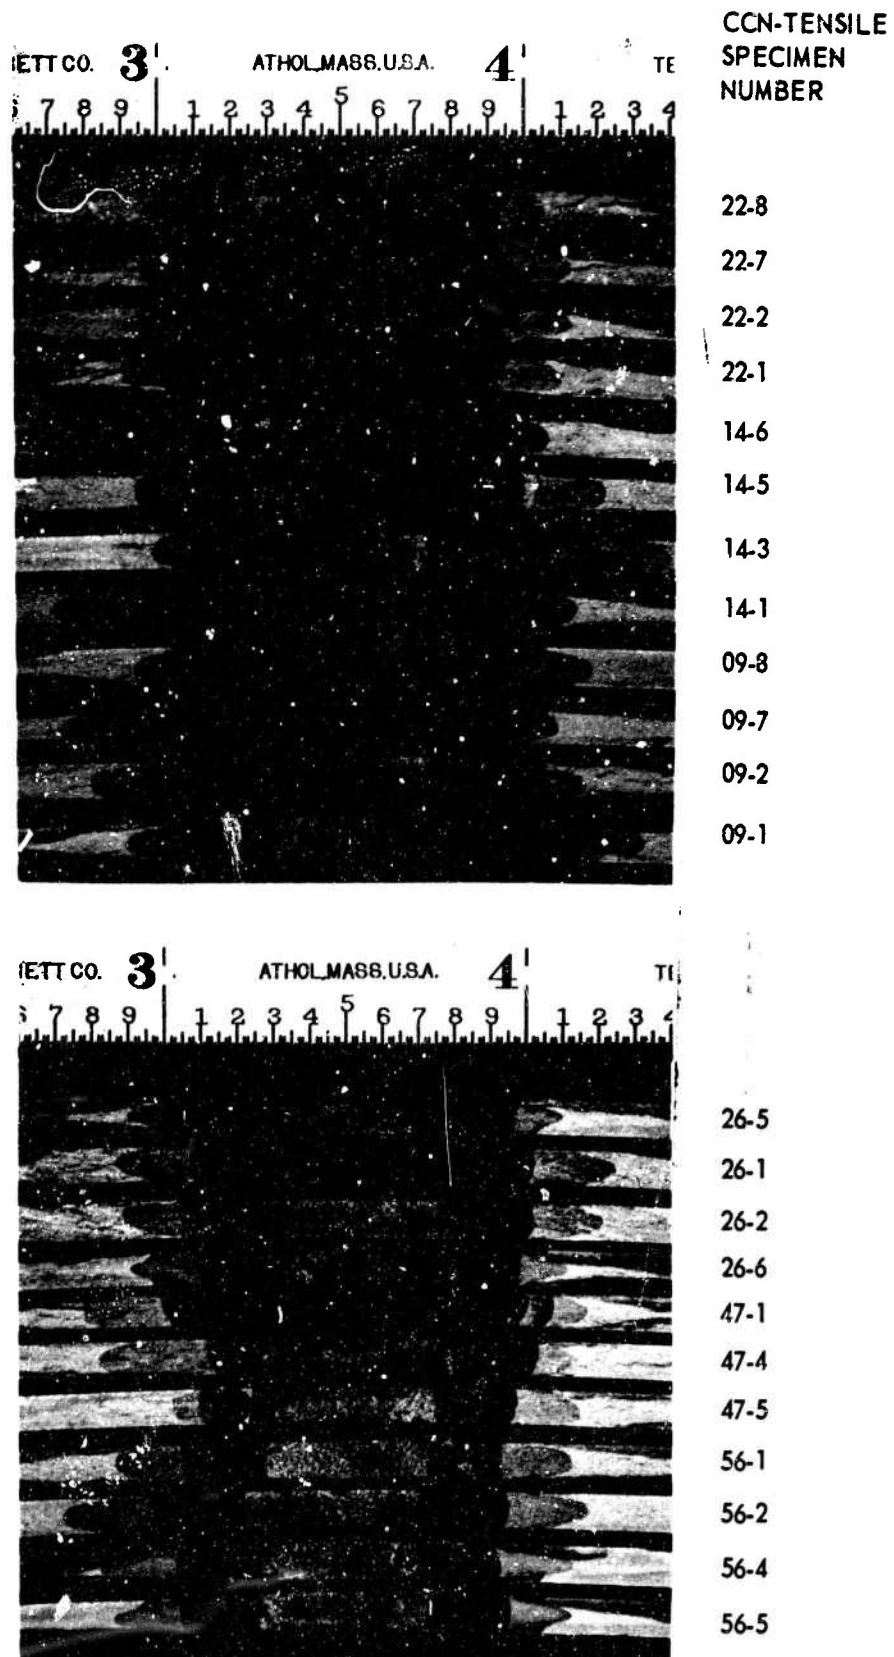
Heat-Tinted CN-Tensile Fracture Surfaces Showing Crack Length at Maximum Load
